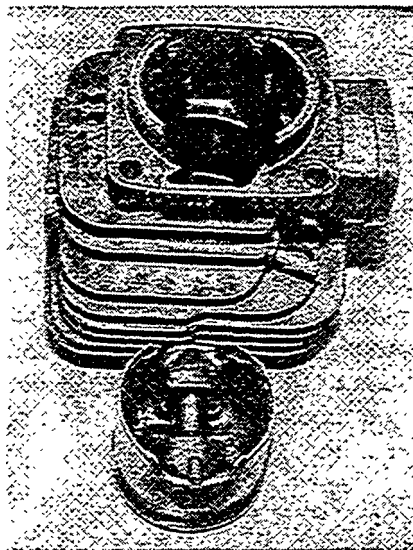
Picture of the cylinder of Jonsered 625 chainsaw engine. This cylinder is equipped with open transfer channels. To the right, the inlet port can be seen, and to the left the exhaust port. The small pipe from the transfer channel supplies pressure pulses from the crankcase to the fuel pump in the carburettor.
